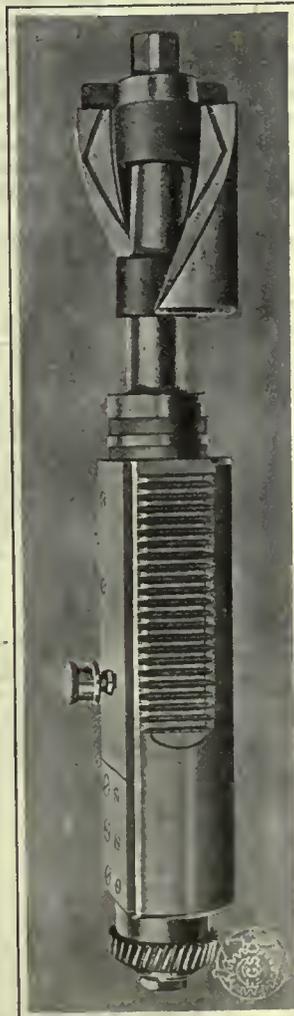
HELICAL GUIDE AND CUTTER WITH CUTTER-SLIDE ASSEMBLED; USED ON THE FELLOWS HELICAL GEAR SHAPER.
